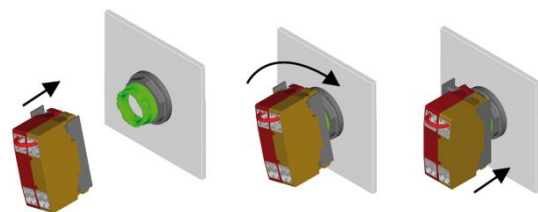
Correct assembly of the modular contact block MTZU, MTZU_564
